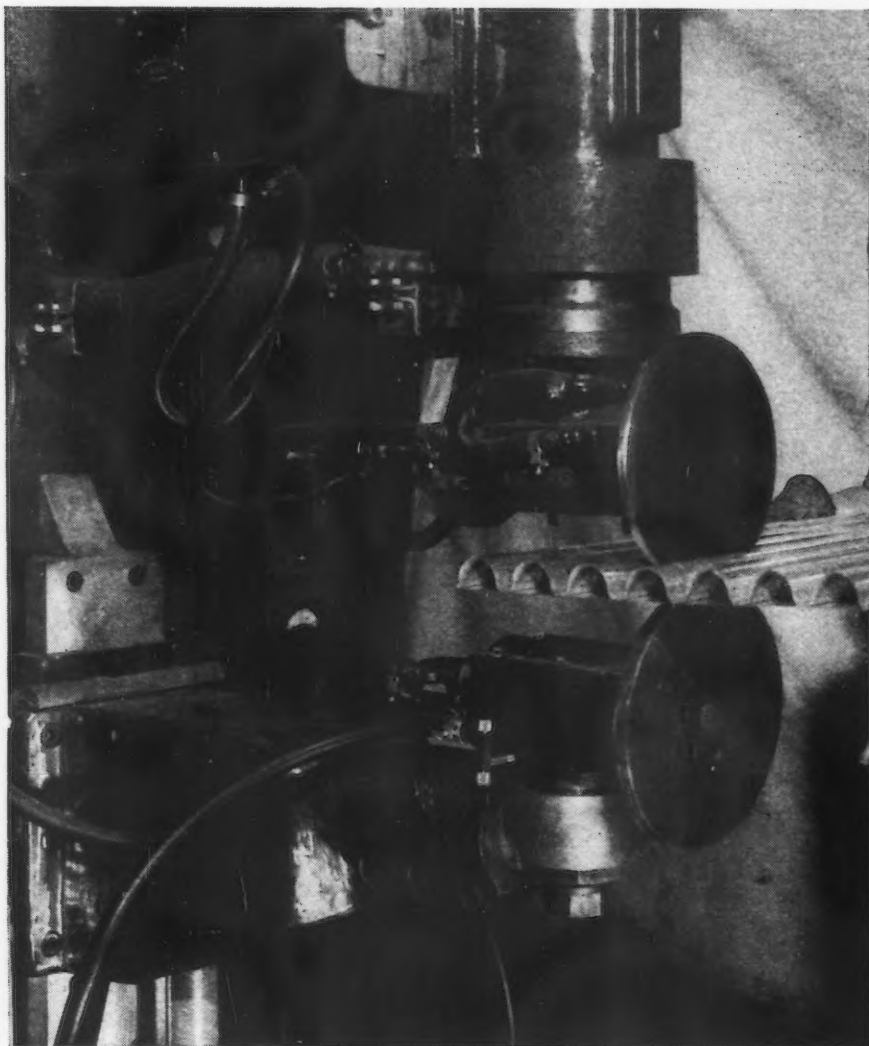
Seam welding makes possible a series of uniformly spaced spot welds by the use of rotary electrodes, greatly speeding up production on long joints.
